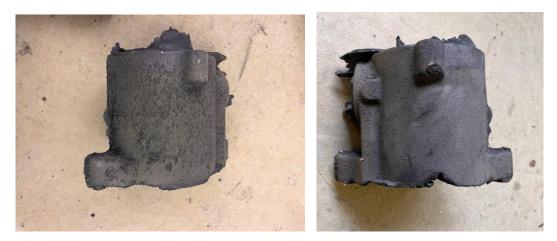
and 4-24: Metal penetrations created a bad surface finish caused by loose sand packing. A defect on the bottom of the part, likely from sand being caught in that corner from corner shrinkage.
